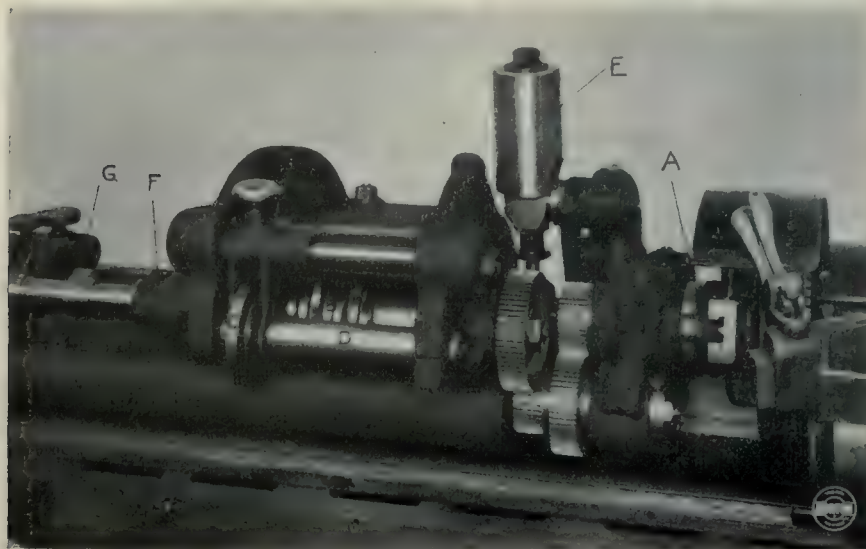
NEAR VIEW OF REAR OF HEADSTOCK END OF ATTACHMENT.
